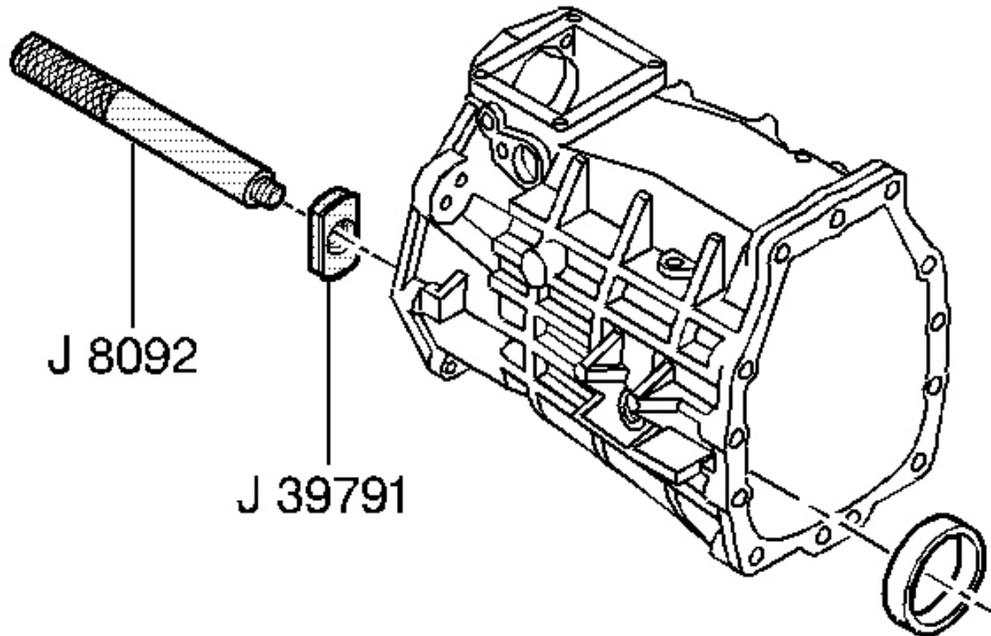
Removing Countershaft Bearing Race Using J 8092 & J 39791
